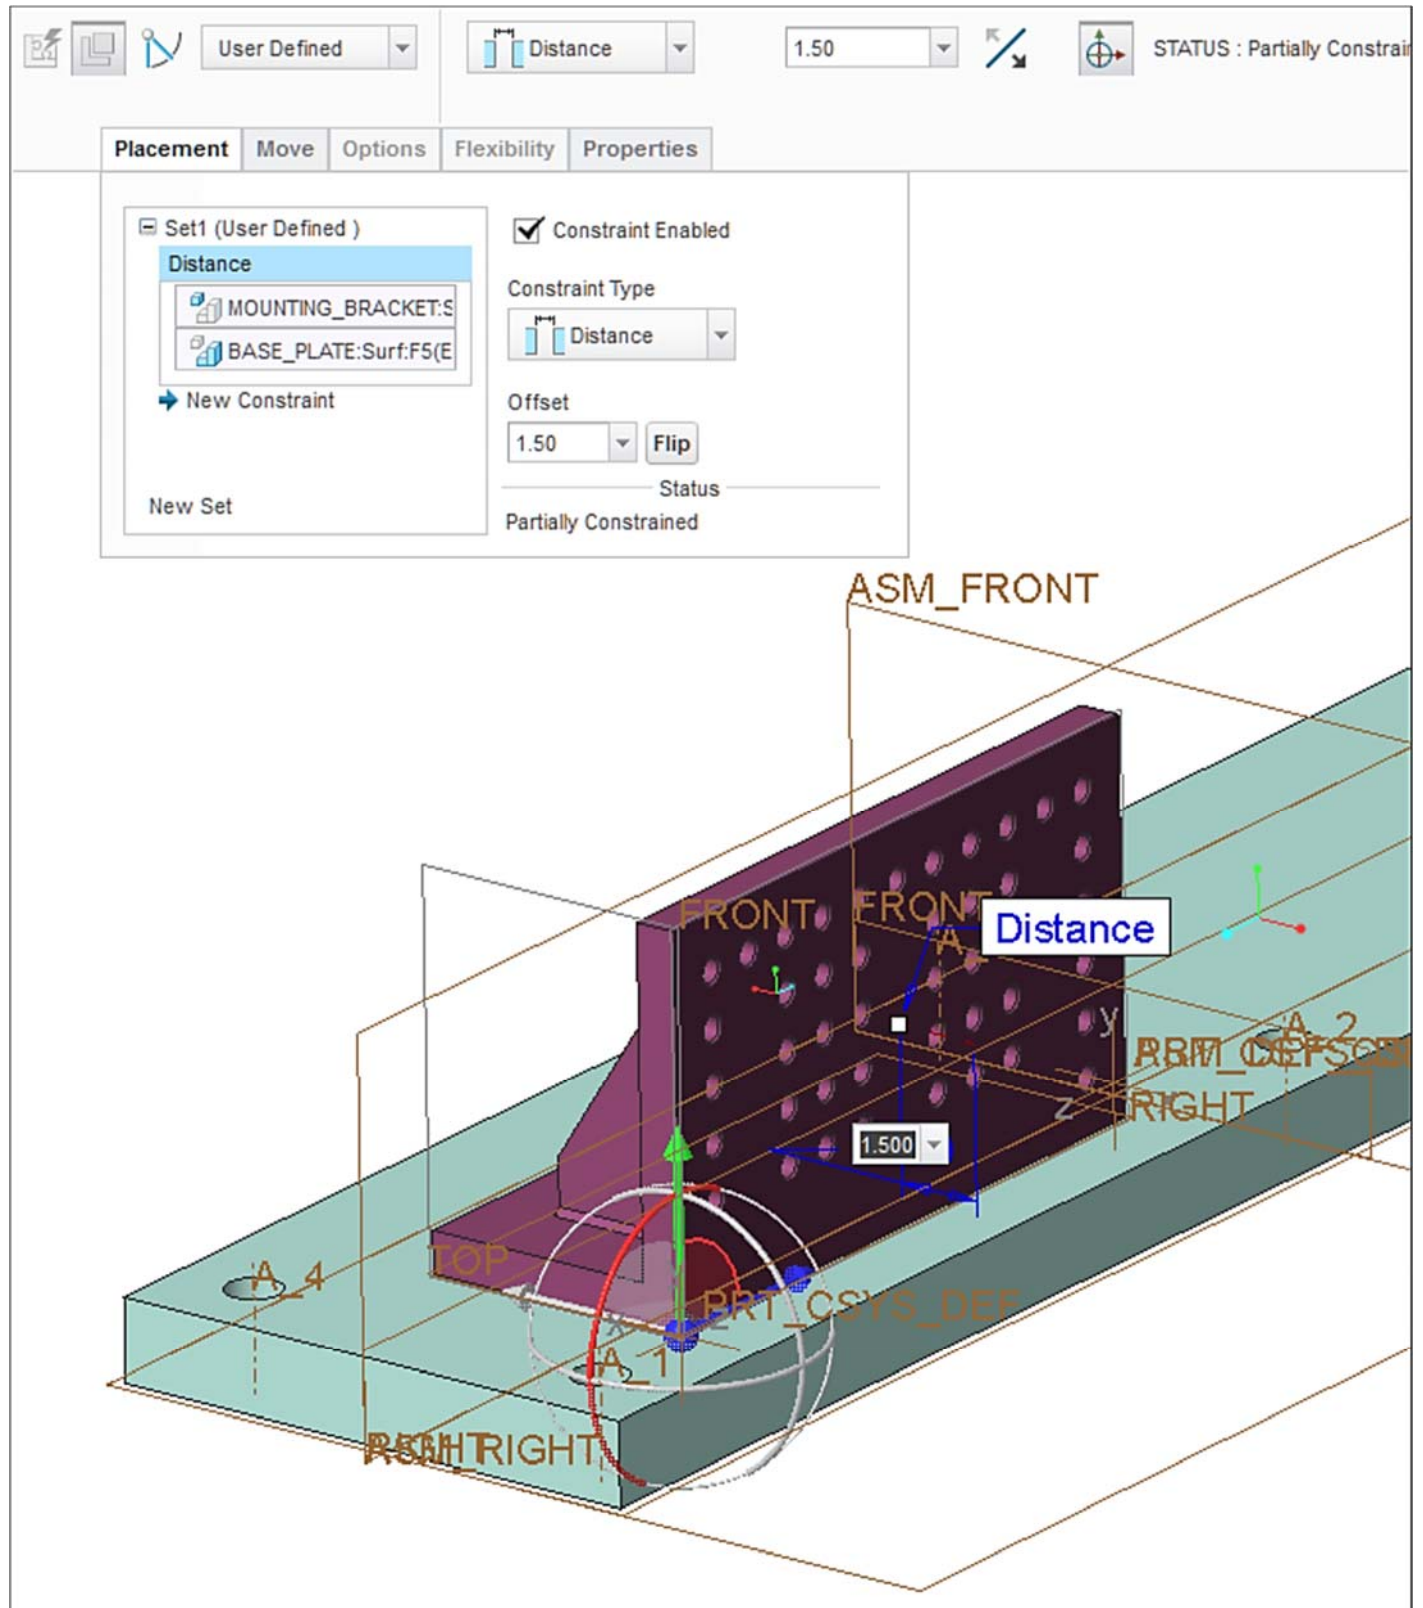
(c) Mounting System Assembly Component Placement Location Dimensions
